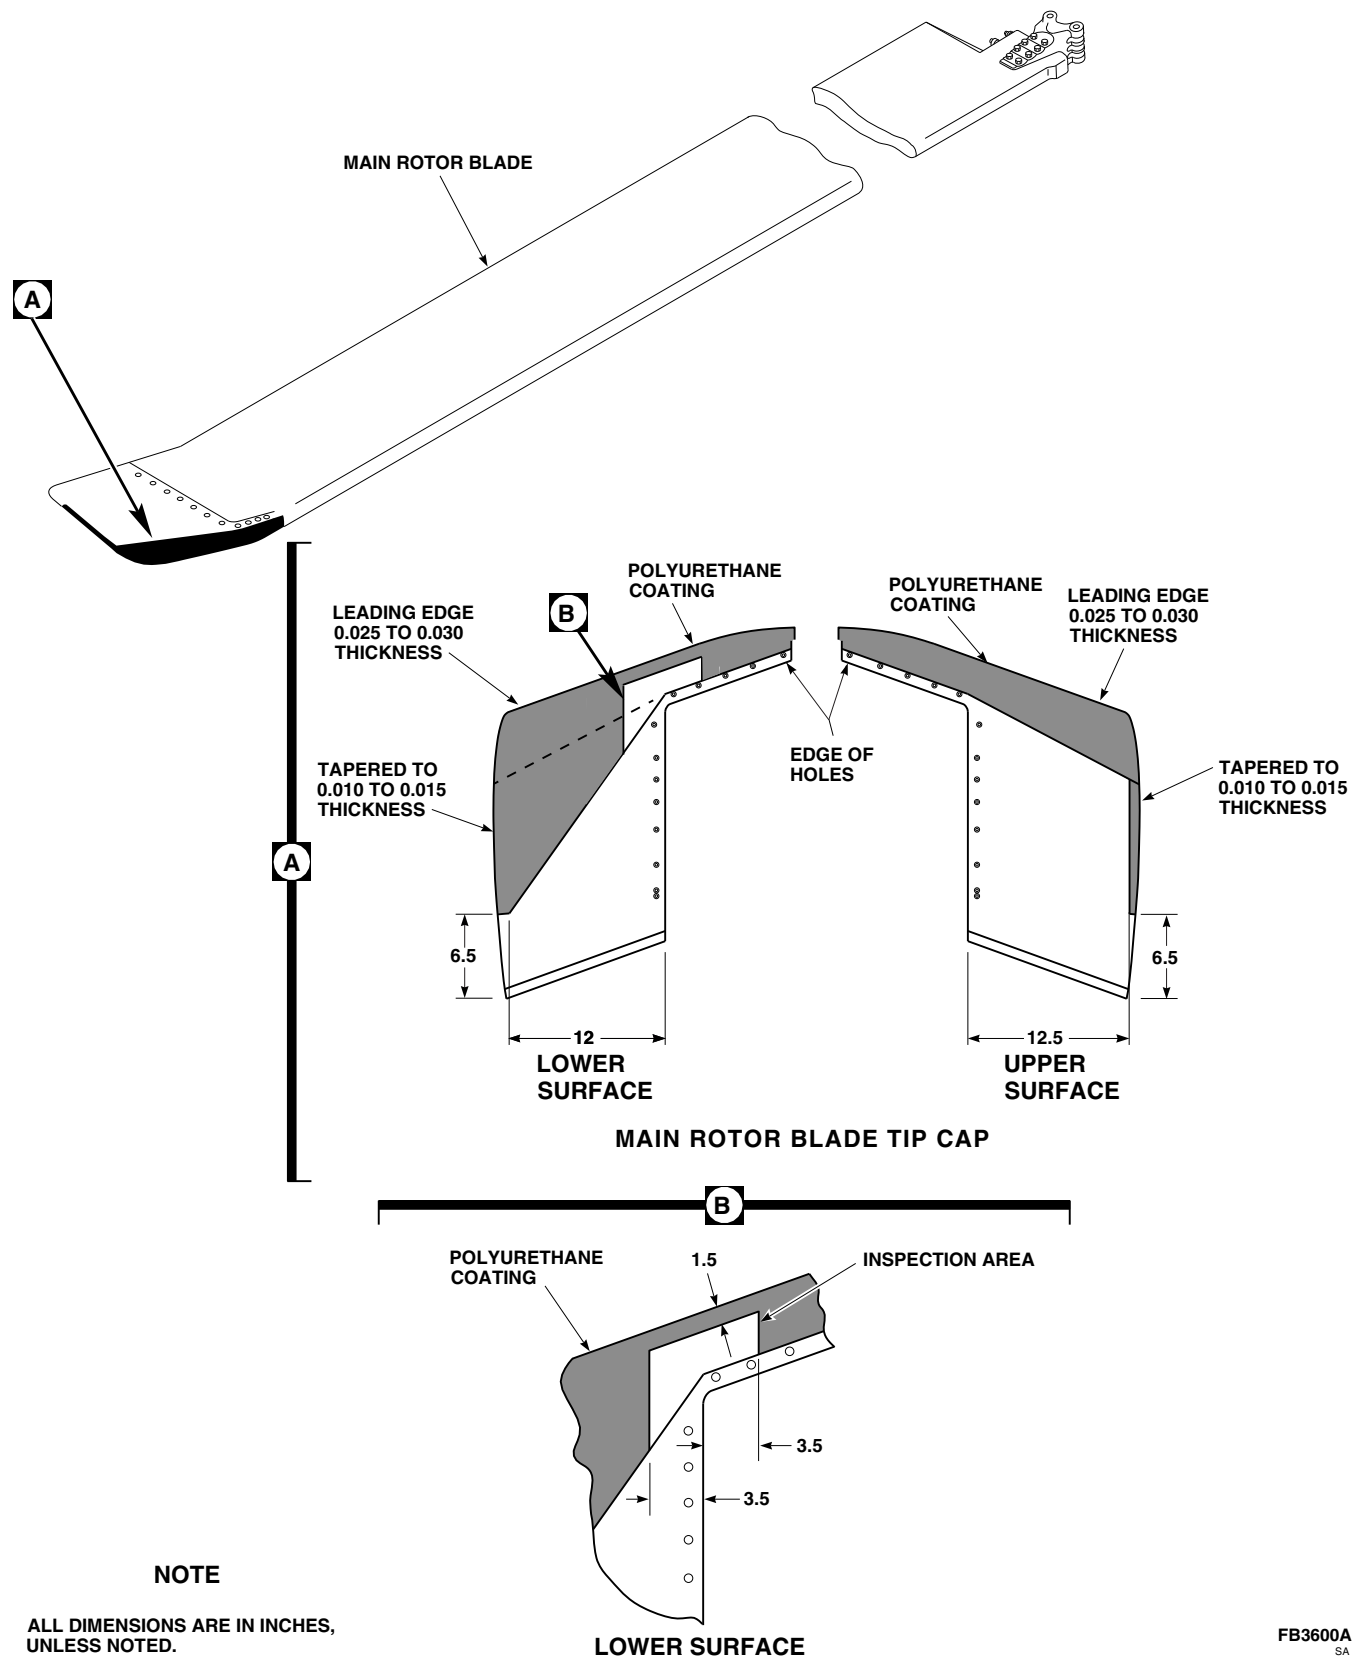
INSTALL BOOT-TO-TIP CAP
